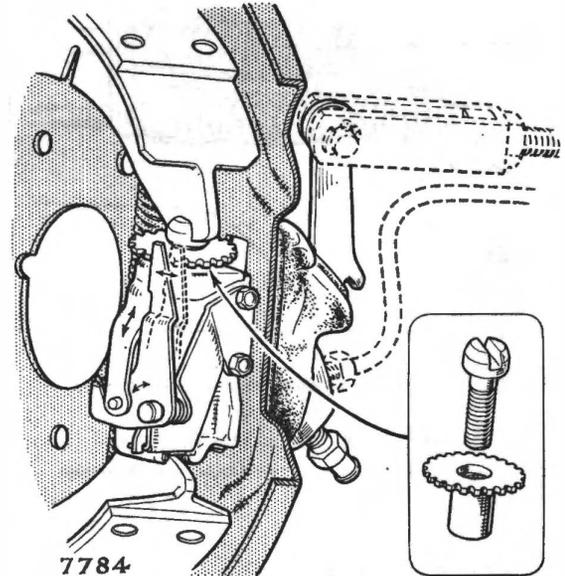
A left hand self adjusting wheel cylinder with arrows on the pawl linkage indicating the direction of travel as the brake is applied and released. The insert shows the screwed tappet and adjuster wheel.
